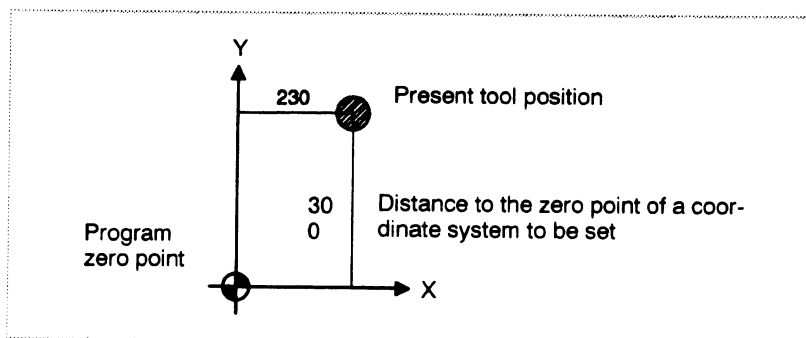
(b) Coordinate system specified by the CNC
